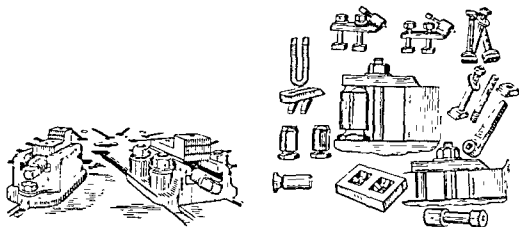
Accessories for setting up and clamping work in vertical turret lathes and boring mills
